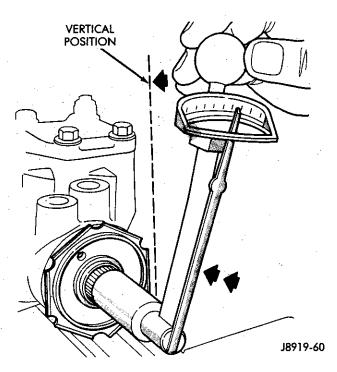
Wormshaft Bearing "Preload" Torque Measurement
